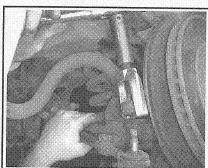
A special removal tool like this one from Lisle® can be used to remove the tie rod end from the knuckle. Just install the tool on the tie rod end and tighten the forcing screw to . . .
